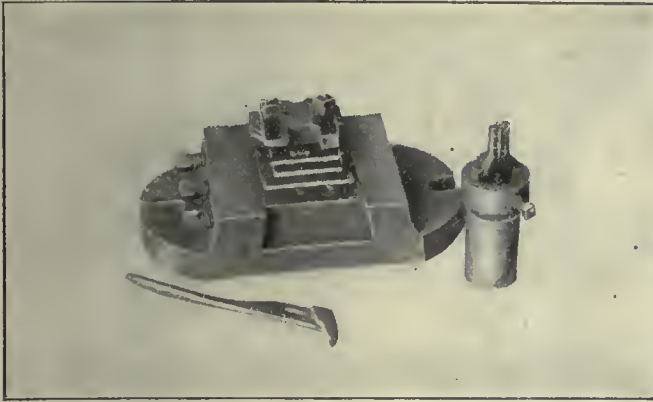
PUNCH AND DIE FOR SMALL SHIFTING HOLES
